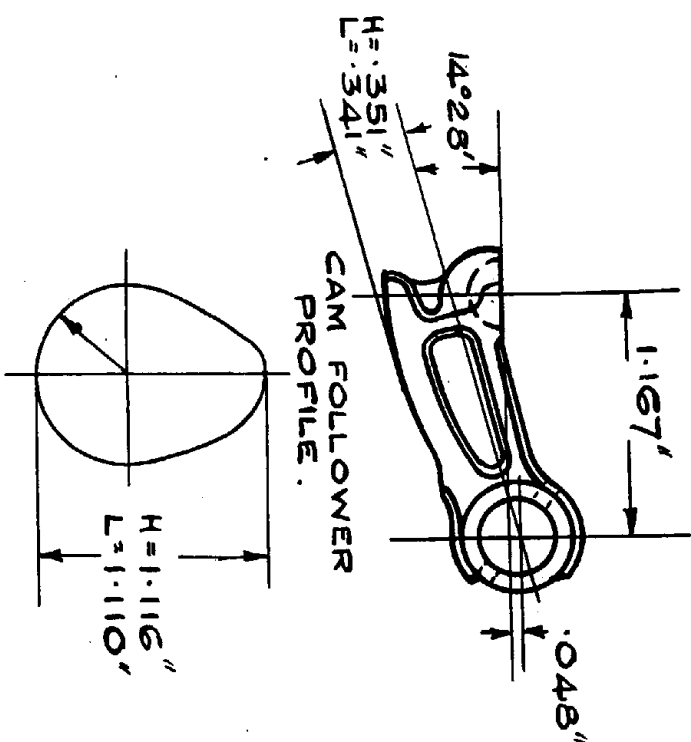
CAM AND CAM FOLLOWER PROFILES.
